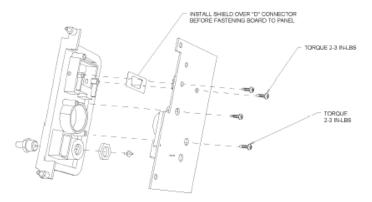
A1 Front Case Assembly Drawing (3 of 3)
